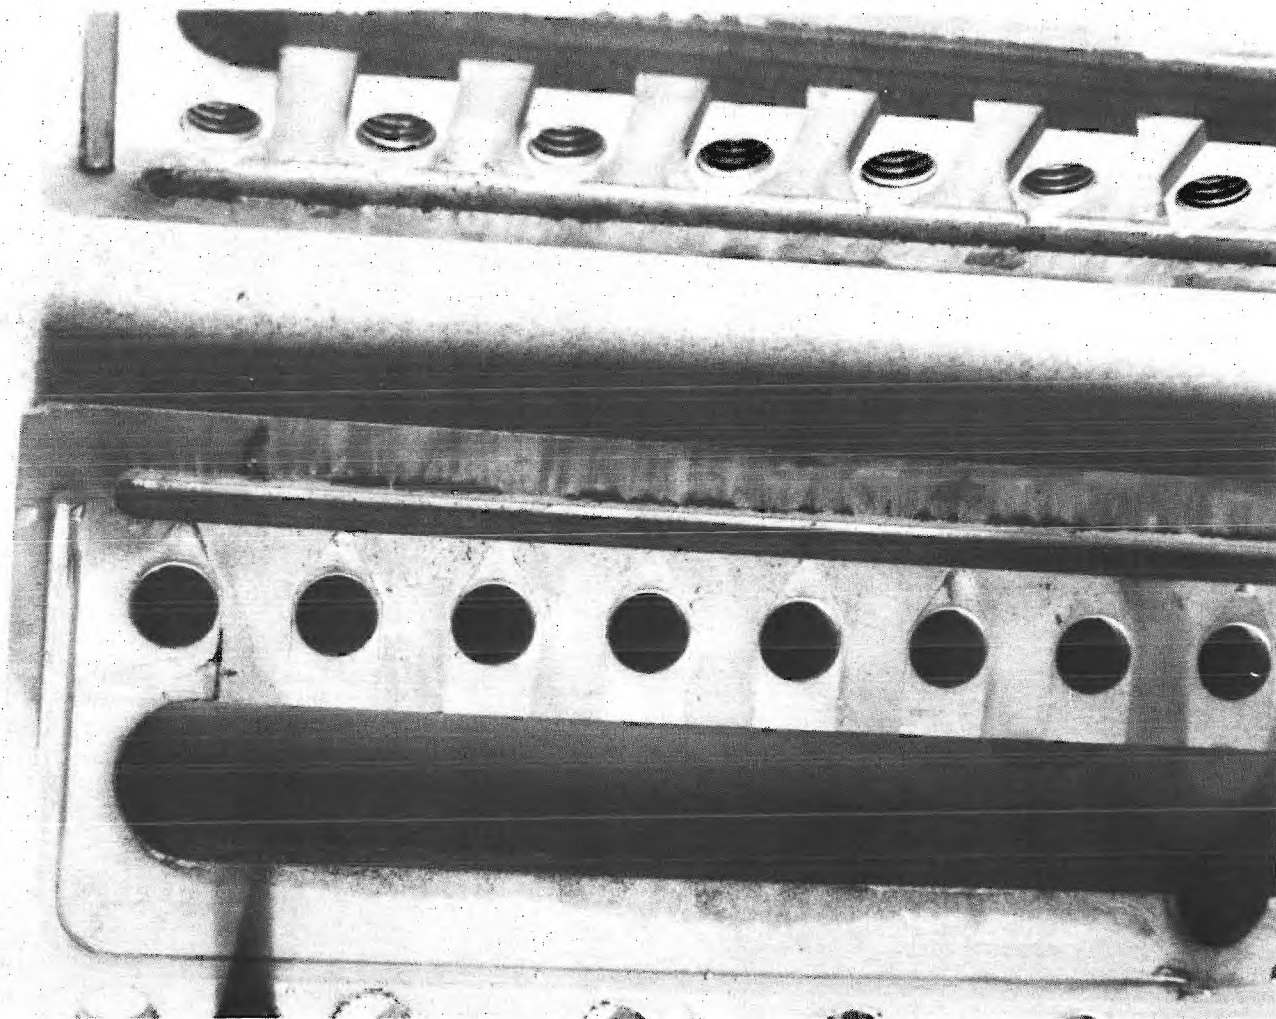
MACHNOZZLE PLUGGED WITH CONTAMINANTS.
